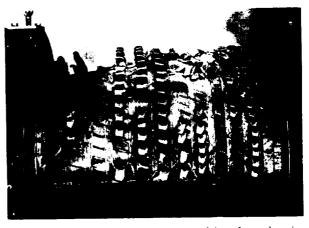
Compressor damage resulting from bearing failure in oil-interruption test (from ref. 1, appendix B).
